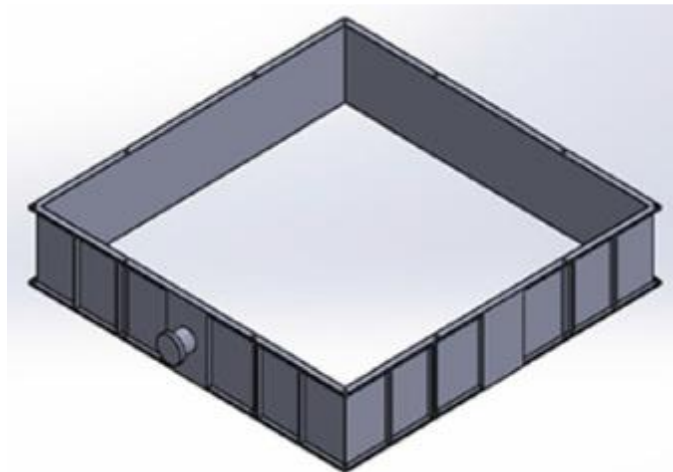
Moulding box geometry3.2.3 Analysis of clay content in mould sand
